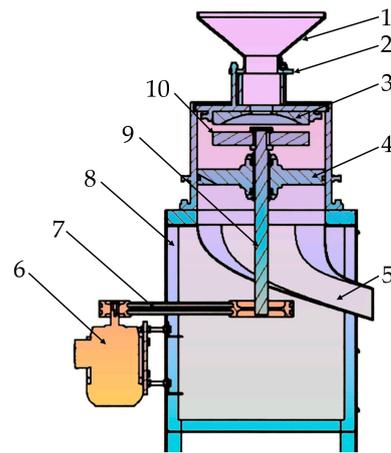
The structure of flaxseed dehulling equipment: (1) hopper; (2) feeding control board; (3) fixed table; (4) fixed device of transmission shaft; (5) outlet port; (6) motor; (7) belt; (8) stand; (9) transmission shaft; (10) dynamic table.
